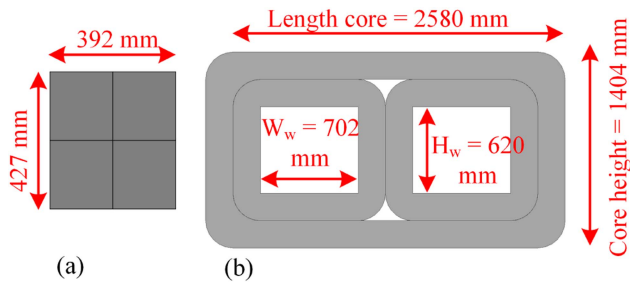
Details of the core design for the MMC-SST transformer: (a) the cross-section of the core, (b) the 3D view of the magnetic core.
